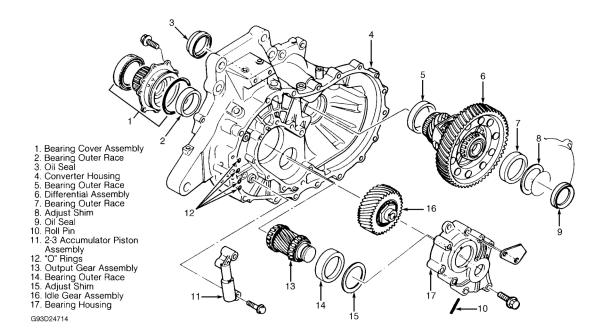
Exploded View Of Idler & Differential Assembly (GF4A-EL Shown; FA4A-EL Similar) Courtesy of MAZDA MOTORS CORP.
